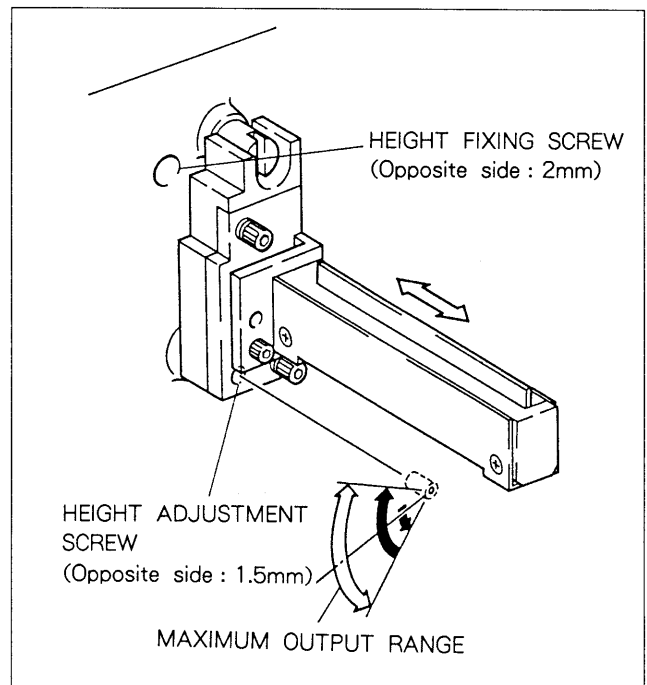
Audio REC Head Height Rough Adjustment
